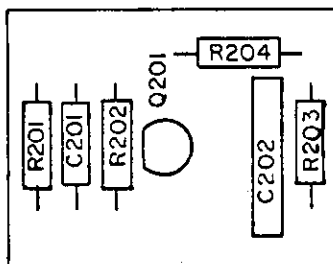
Component Layout of Pulser Circuit Board (10534-A38A)
